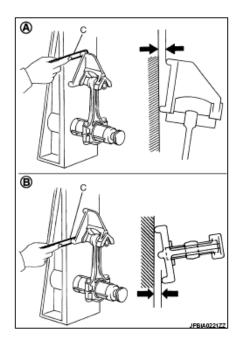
Checking Connecting Rod Aligner Courtesy of NISSAN MOTOR CO., U.S.A.
